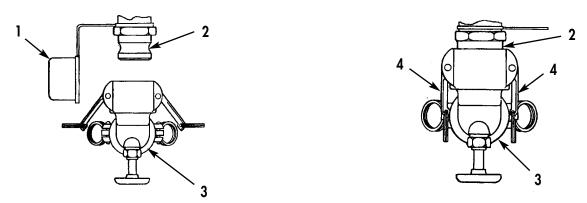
Coupler Valve Intalled and Locked onto Adapter Assembly.
